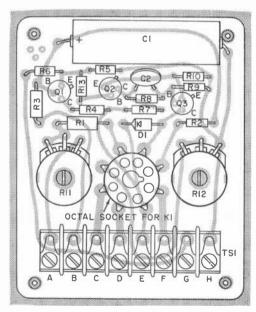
If you make or buy a printed circuit board the components should be positioned as shown. The 3 spare holes in the corner mount a socket to hold Q1 when this transistor is not in the circuit.
